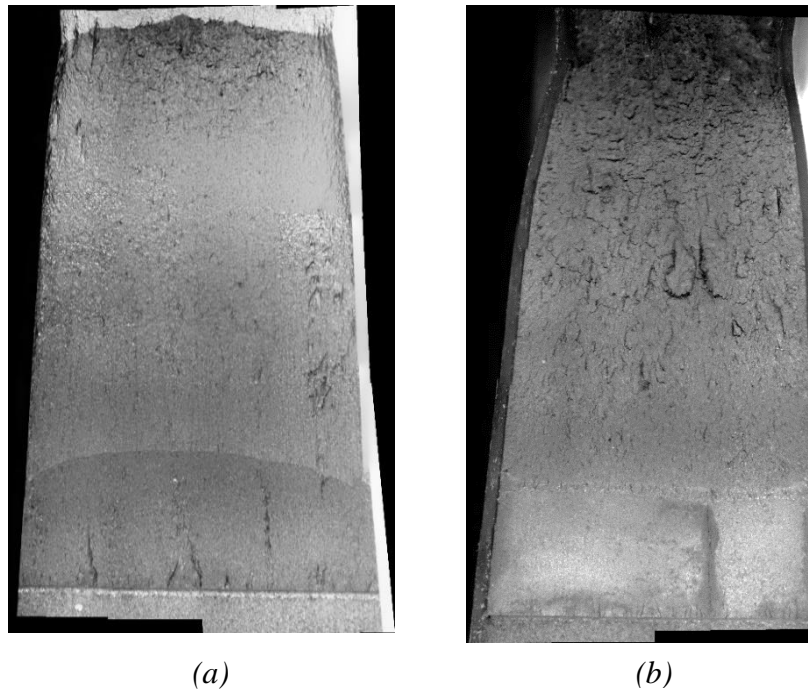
Macroscopic fracture surface, Batch 2 Macroscopic fracture surface at 700°C (a) FCG at a frequency of 15Hz, (b) CFCG with hold time of 60s hold
